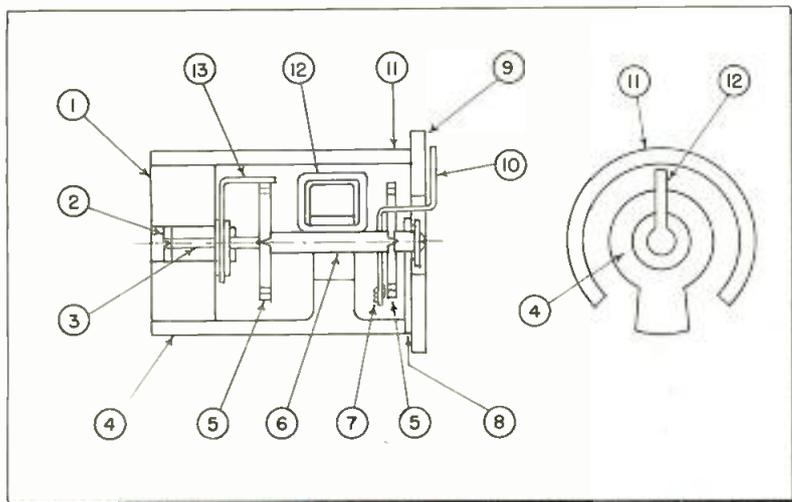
Meter construction: 1. magnet with tapped insert 2. jewel screw 3. jewel screw 4. core & core support 5. hair spring 6. pivot staff 7. counter balance 8. jewel screw support 9. scale 10. pointer & cross arm 11. outer pole 12. coil form 13. bottom regulator
